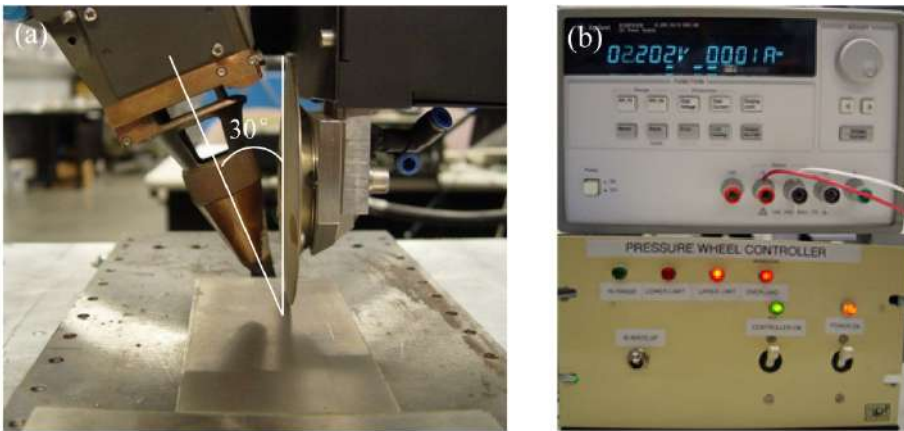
(a) The close-up of pressure wheel set-up and (b) the pressure wheel controller
